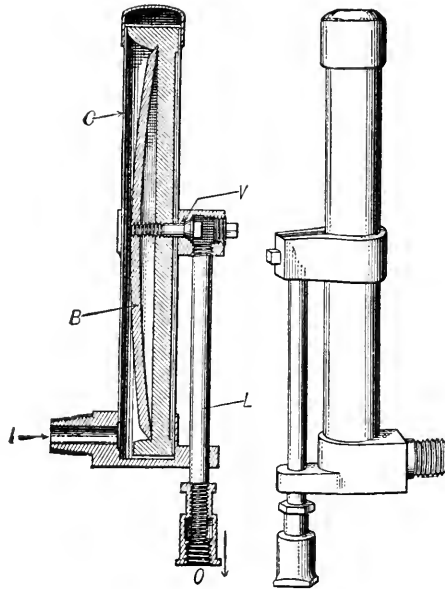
BRECKENRIDGE AIR VALVE FOR STEAM MAINS.
